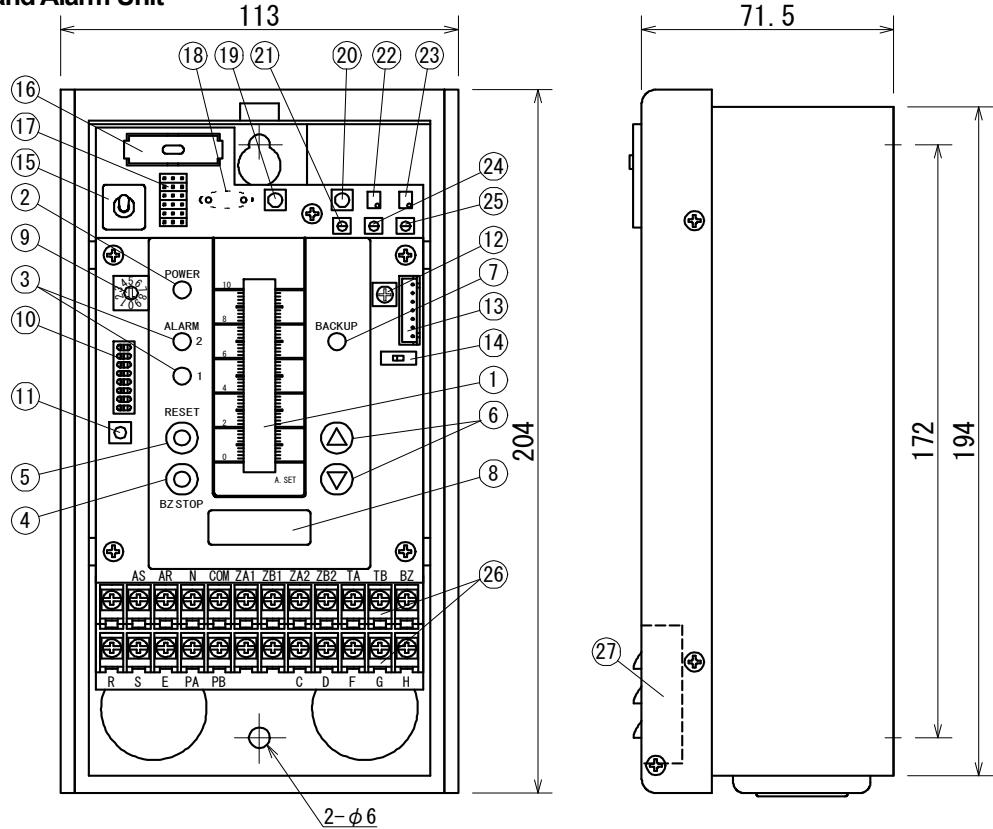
Dimensions of the Indicator and Alarm Unit without a Backup Power Supply
